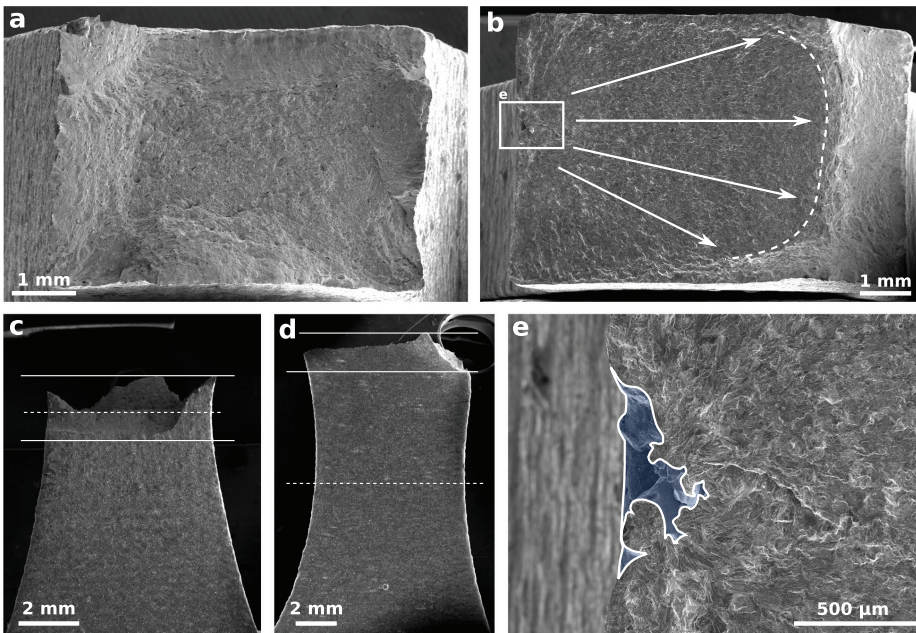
Fractography of unnotched specimens. (a) Fracture surface, static loading (b) Fracture surface, cyclic loading (c) Front view, static loading (d) Front view, cyclic loading (e) Defect from fracture surface in cyclic loading
